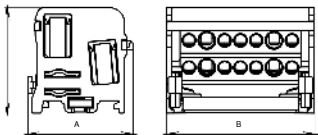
Overall dimensions of the cross-module (2x7) 100 A
